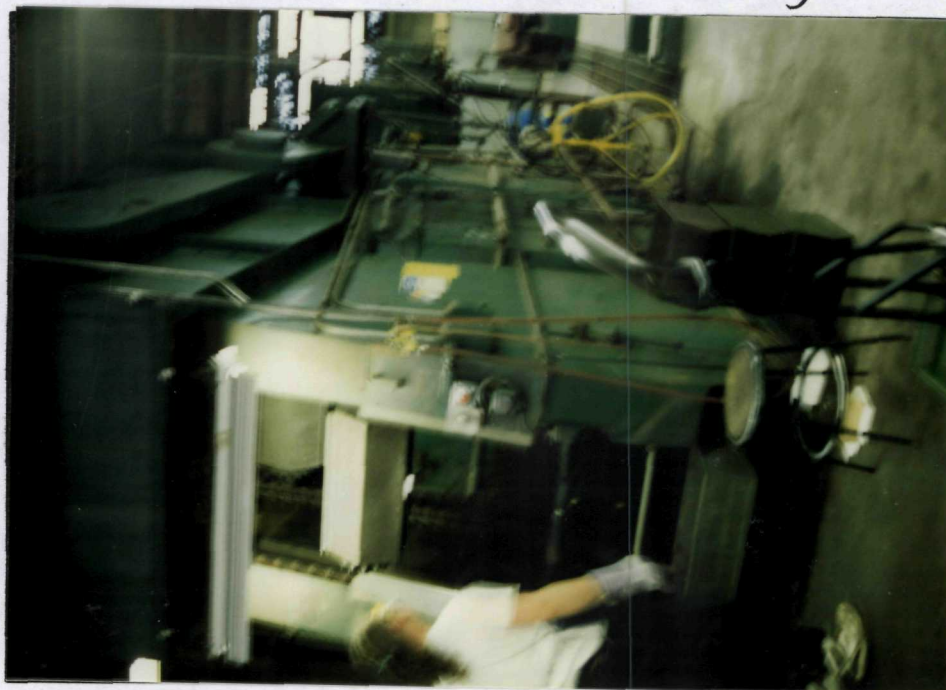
^(1st roll) SWMU No.: 3 : Tumbling/Cleaning Area
